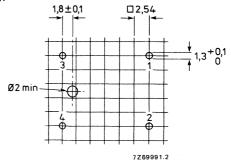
Hole pattern for mounting on a printedwiring board (component side).
